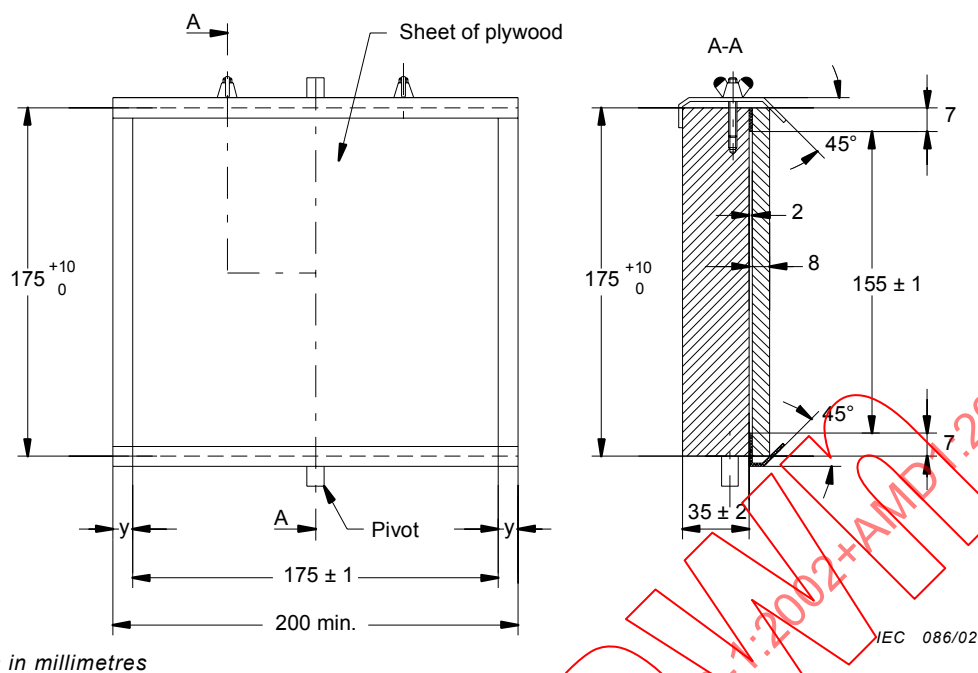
Striking element for pendulum for mechanical impact test apparatus (9.13.2)
